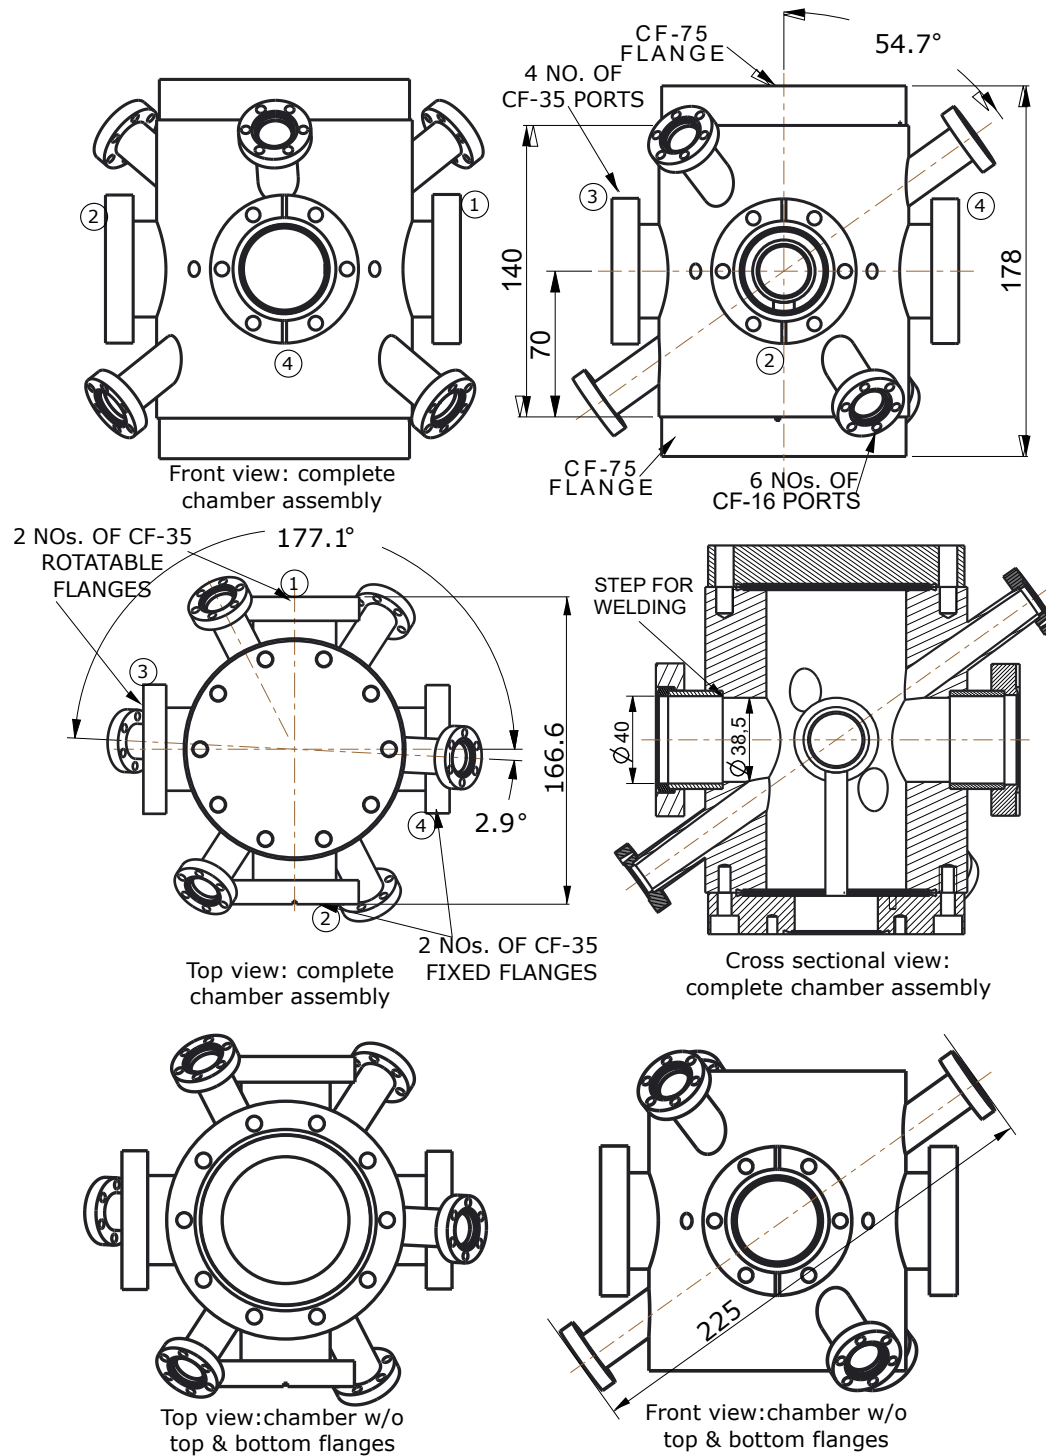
Detailed dimensional drawing of UHV chamber assembly. All the dimensions of length are in units of millimeter and the angles are in degree.
